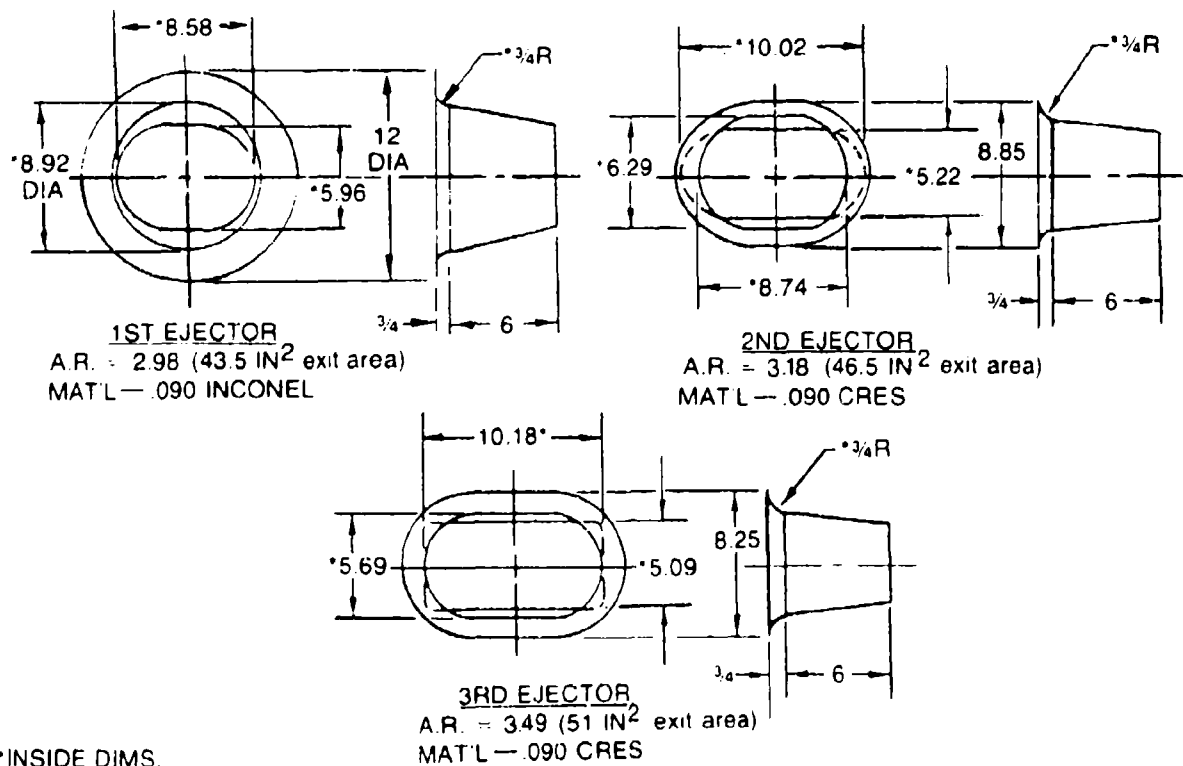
Dimensional drawings of single engine Coanda surfaces and ejectors for coannular flow test.
